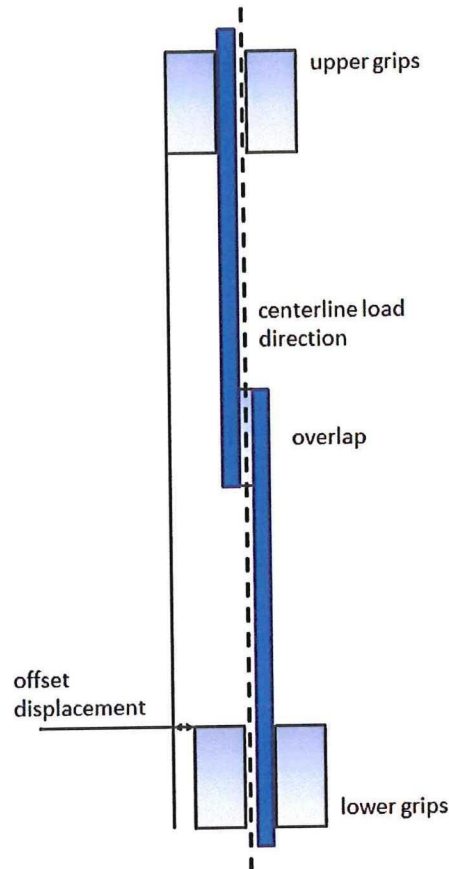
| Schematic view of the offset displacement between the top and lower grip of the Zwick 250 kN universal testing machine, allowing to align the load direction with the centre weld line to minimize bending during static the lap shear strength test
